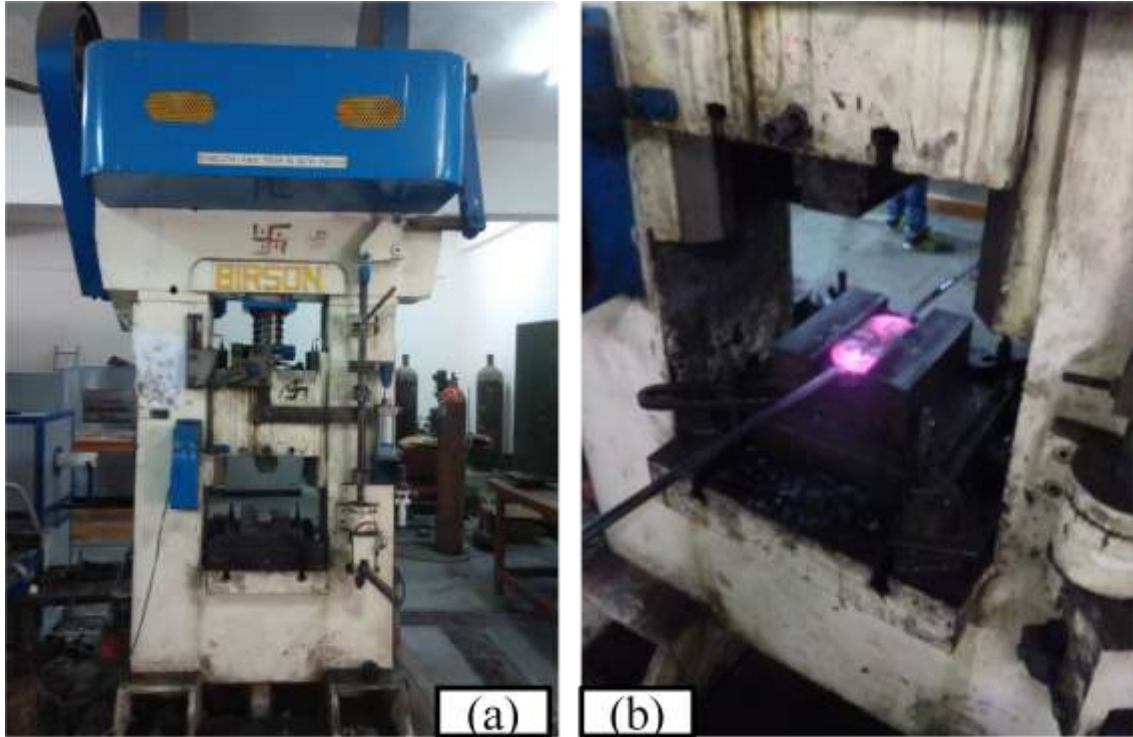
(a) Friction screw forging press (b) Forged sample in open channel die
